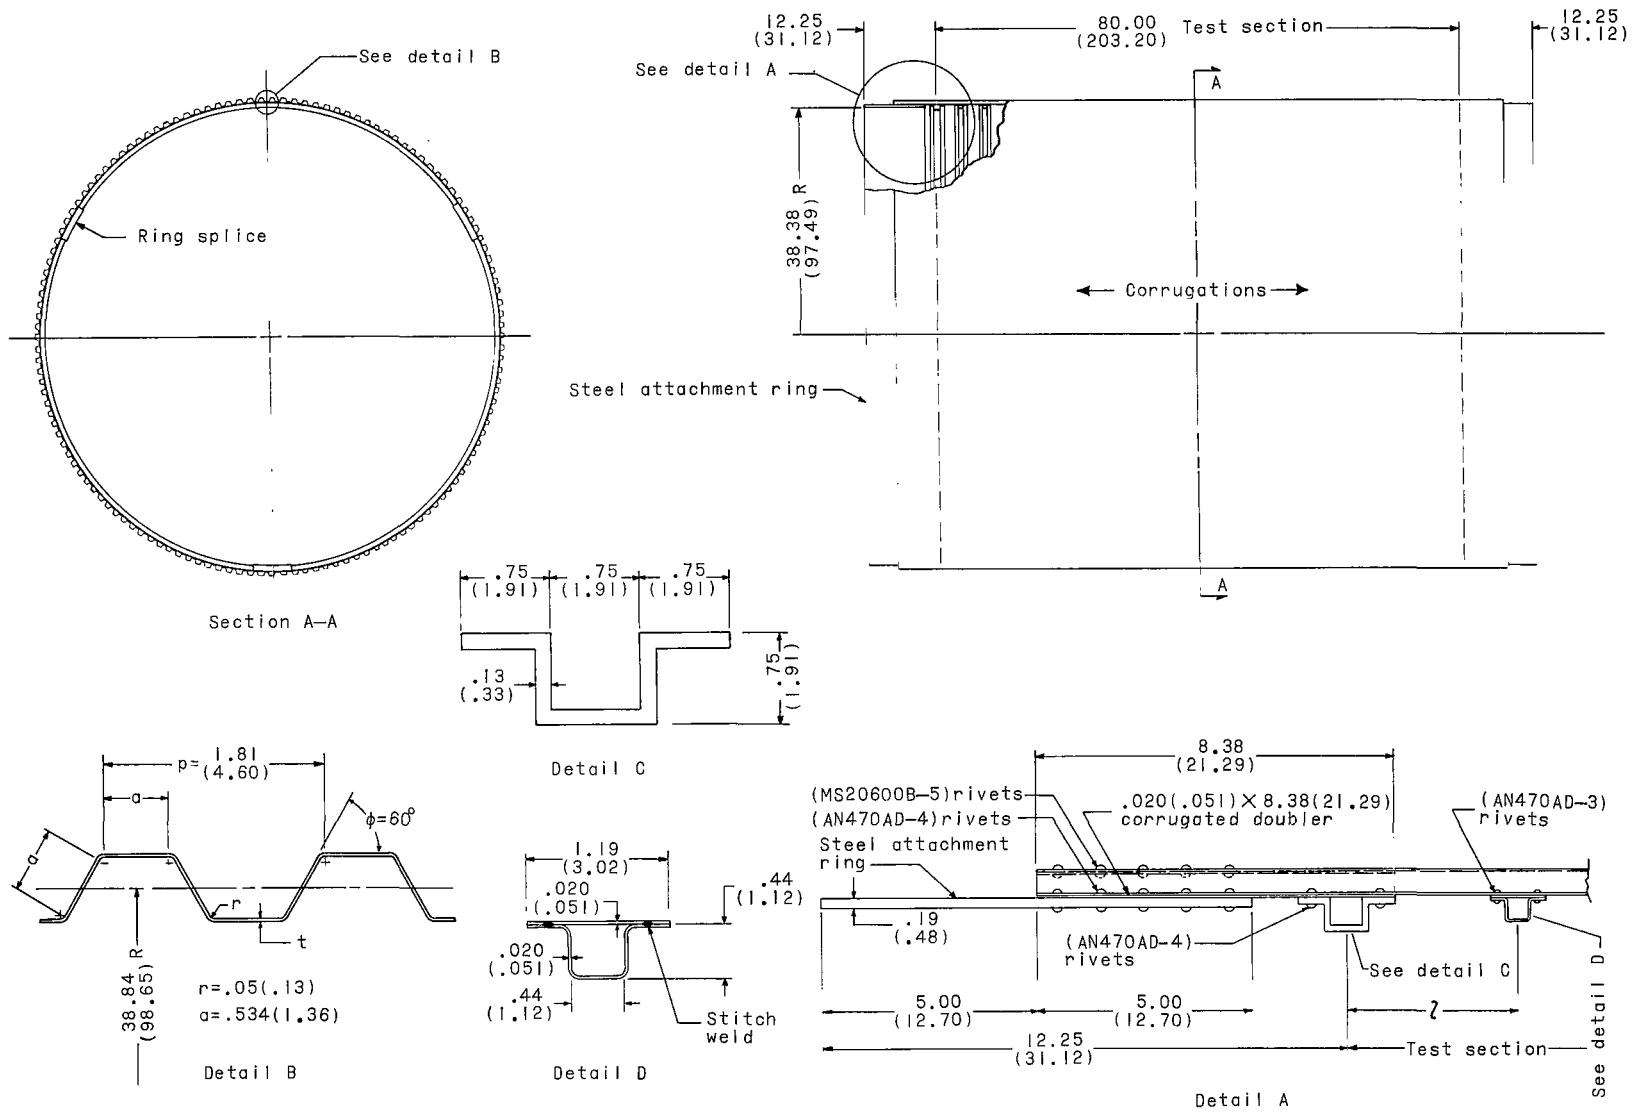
Details of test cylinders. Dimensions are in inches (centimeters).
